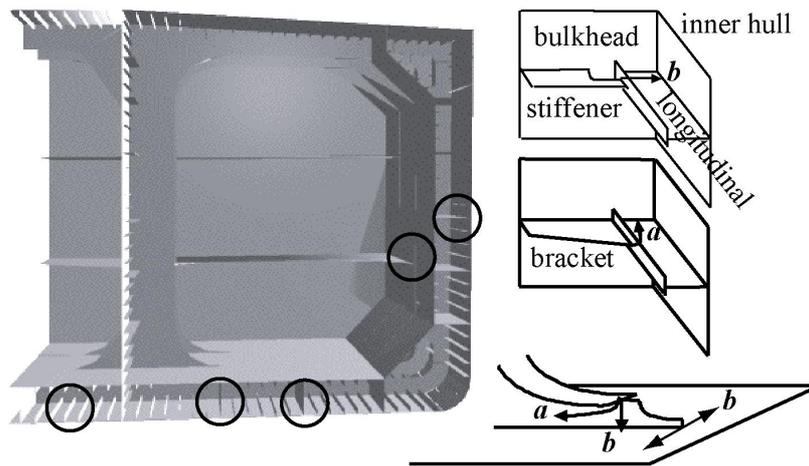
Typical fatigue cracks in ship structures, where cracks of type (b) should be prevented.
